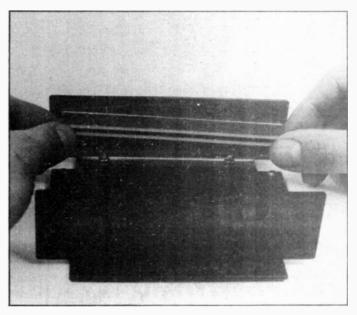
PCB guide-rails make an easy method of positioning and holding circuit boards
